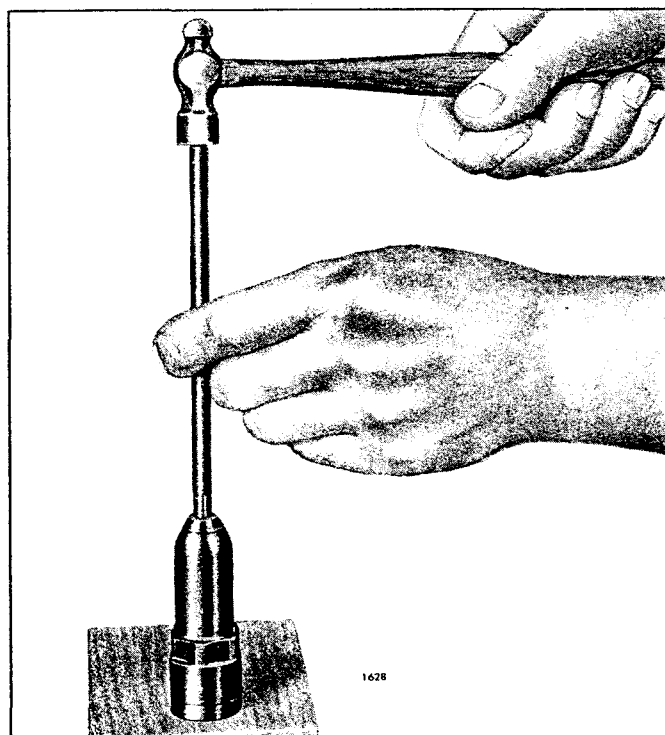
Removing Spray Tip from Injector Nut Using Tool J 1291-02
